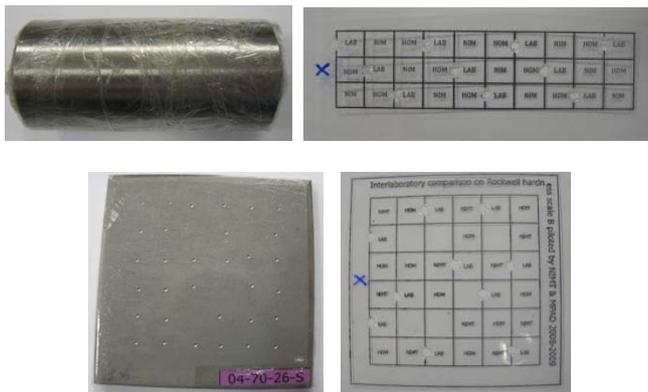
Machinery part artifacts and indentation-positioning sheet
